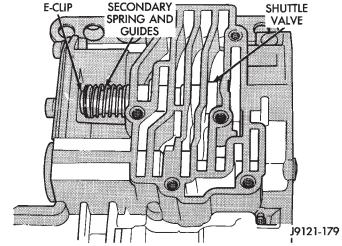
Shuttle Valve E-Clip And Secondary Spring Location
